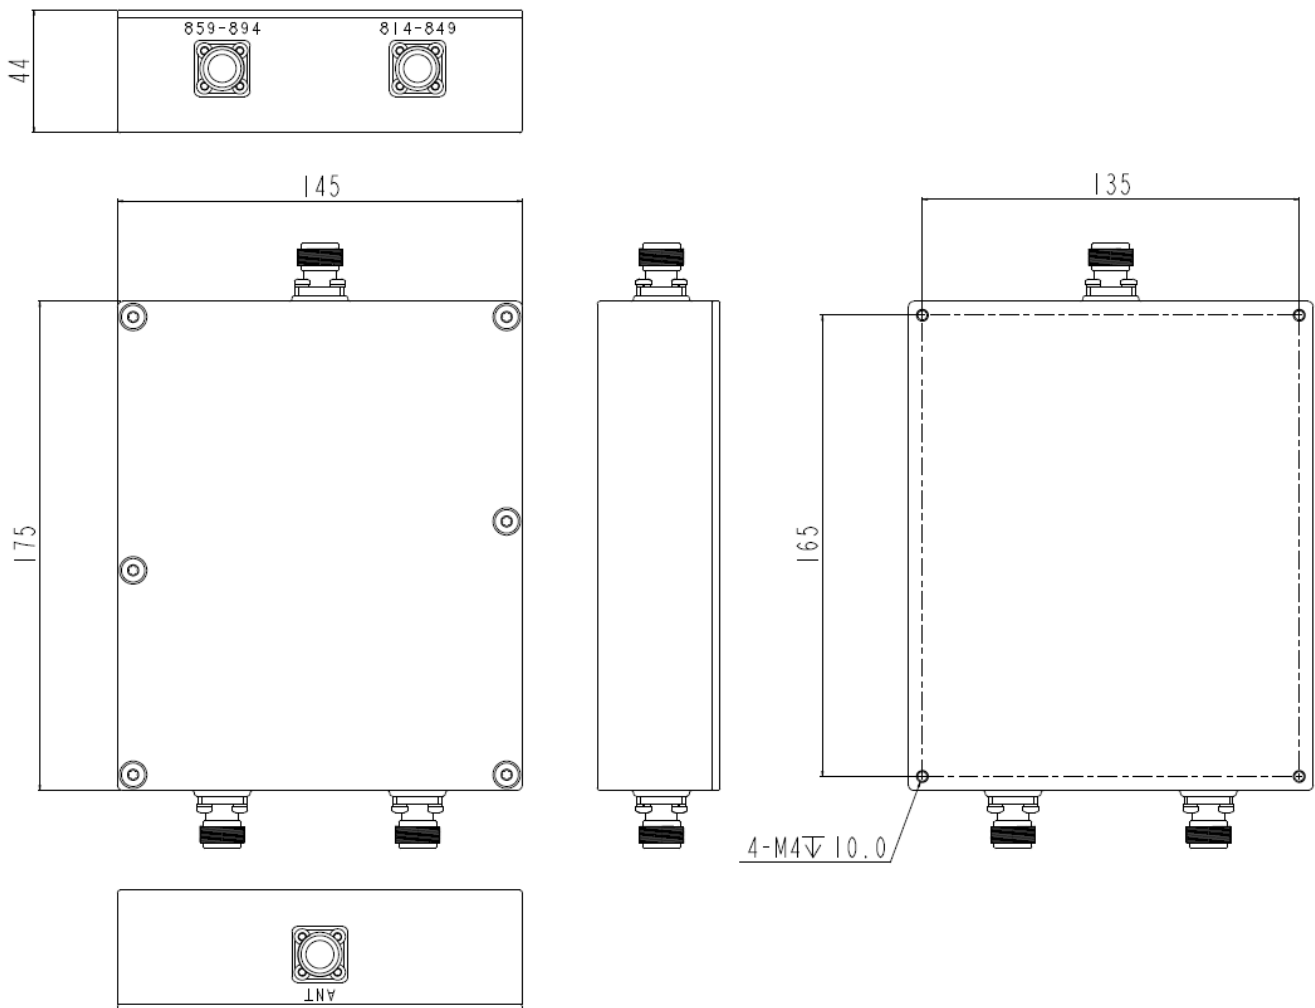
JX-CD2-814M894M-70NWP front panel layout
